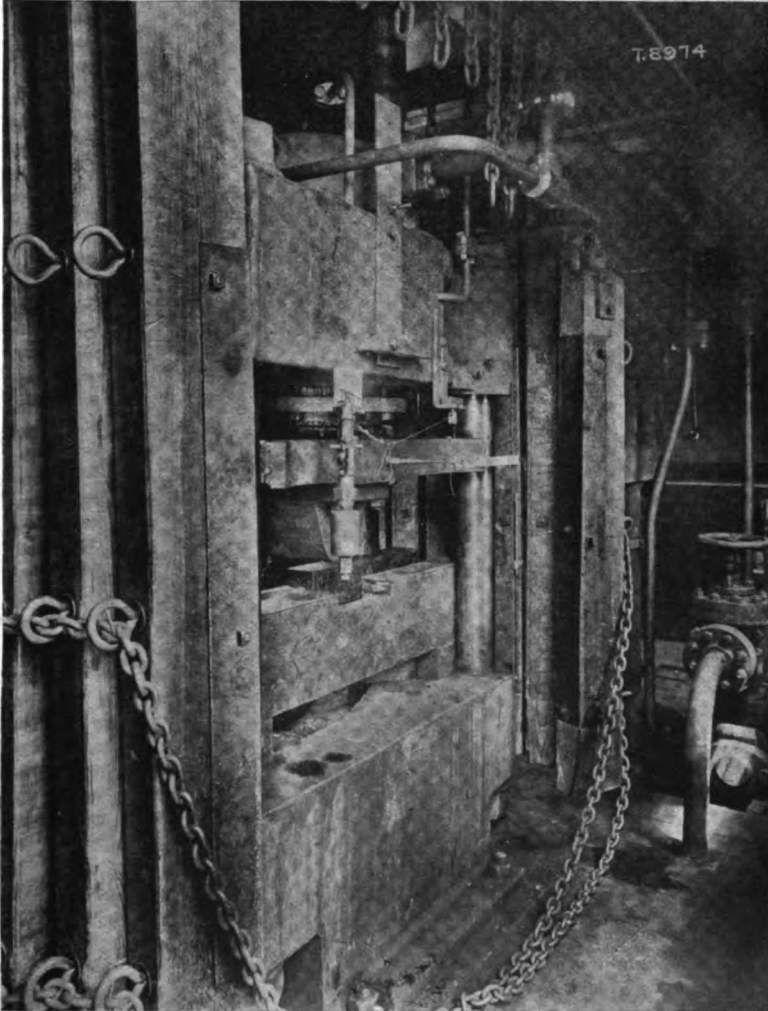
QUICK BEND TEST MACHINE SHOWING SAFETY GUARDS.
